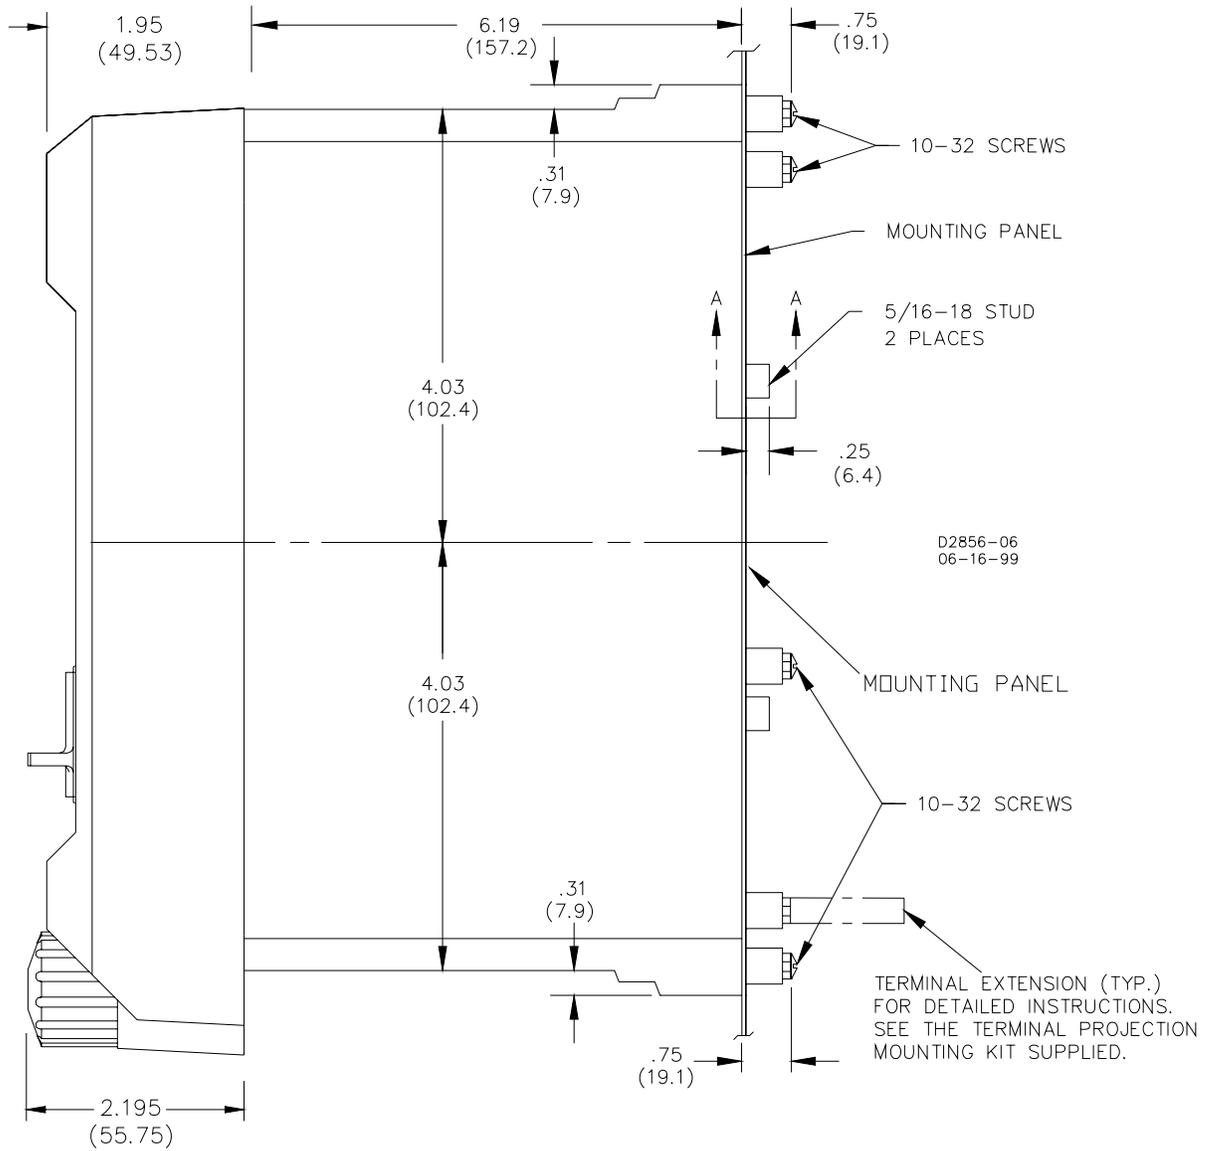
Case Dimensions, Side View, Double-Ended Projection-Mount Case
